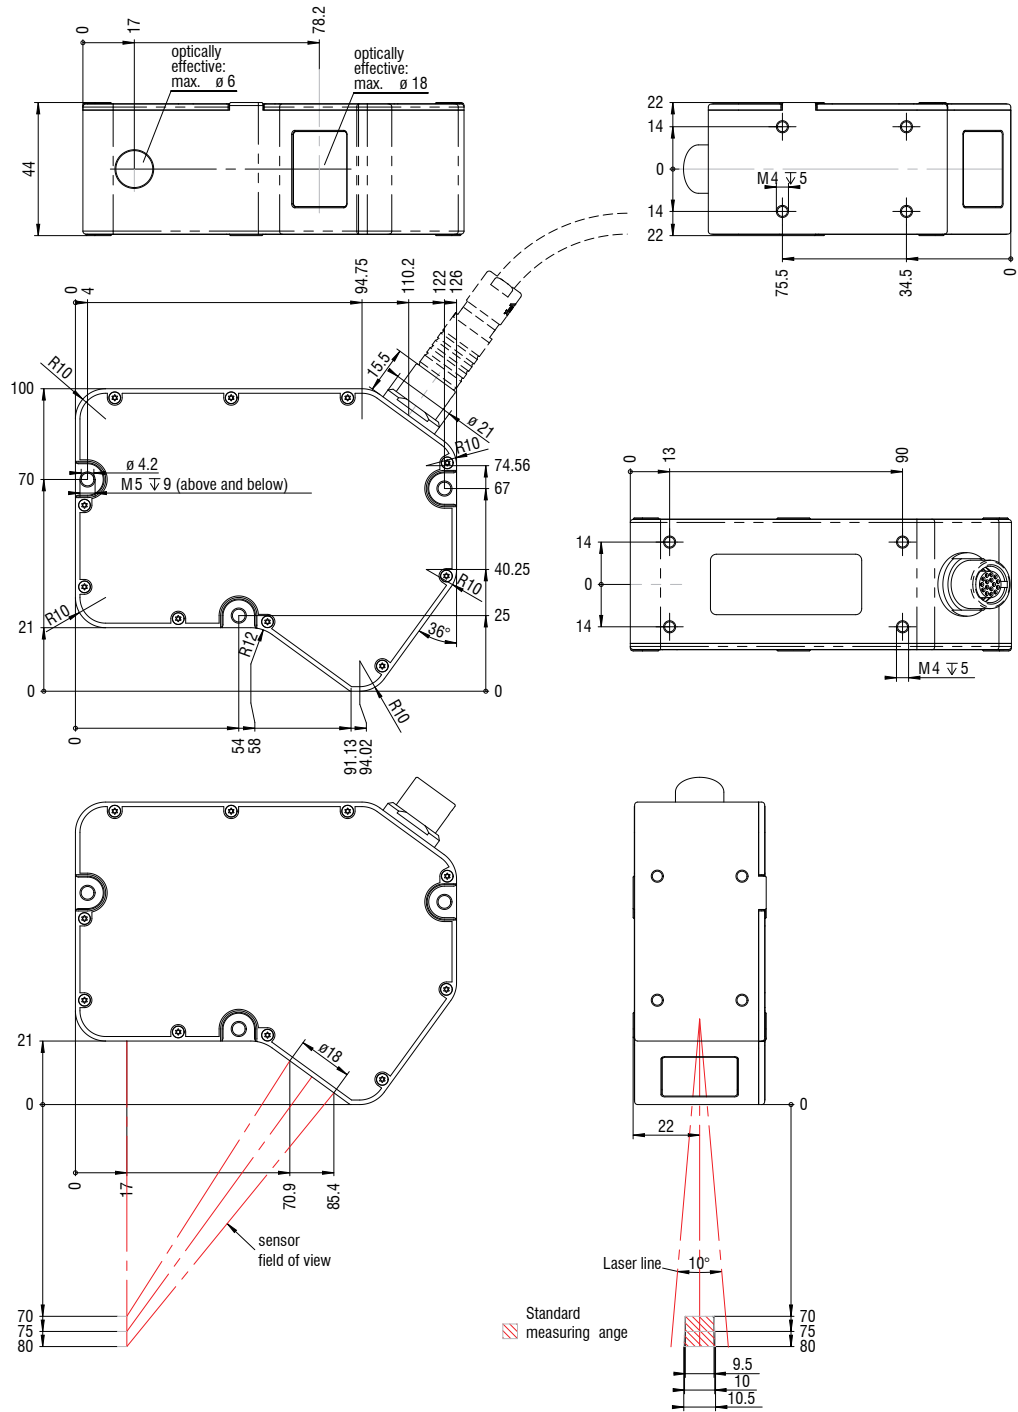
Dimensional drawing LLT 28x0-10, dimensions in mm (inches)
